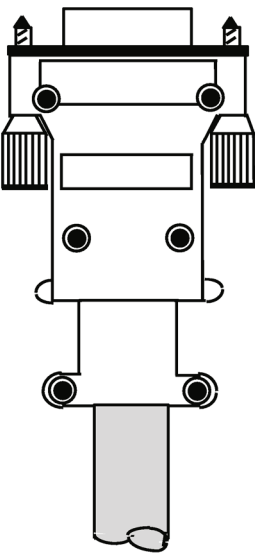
Industrial Twisted Pair D-sub plug (9-pin) for user assembly
